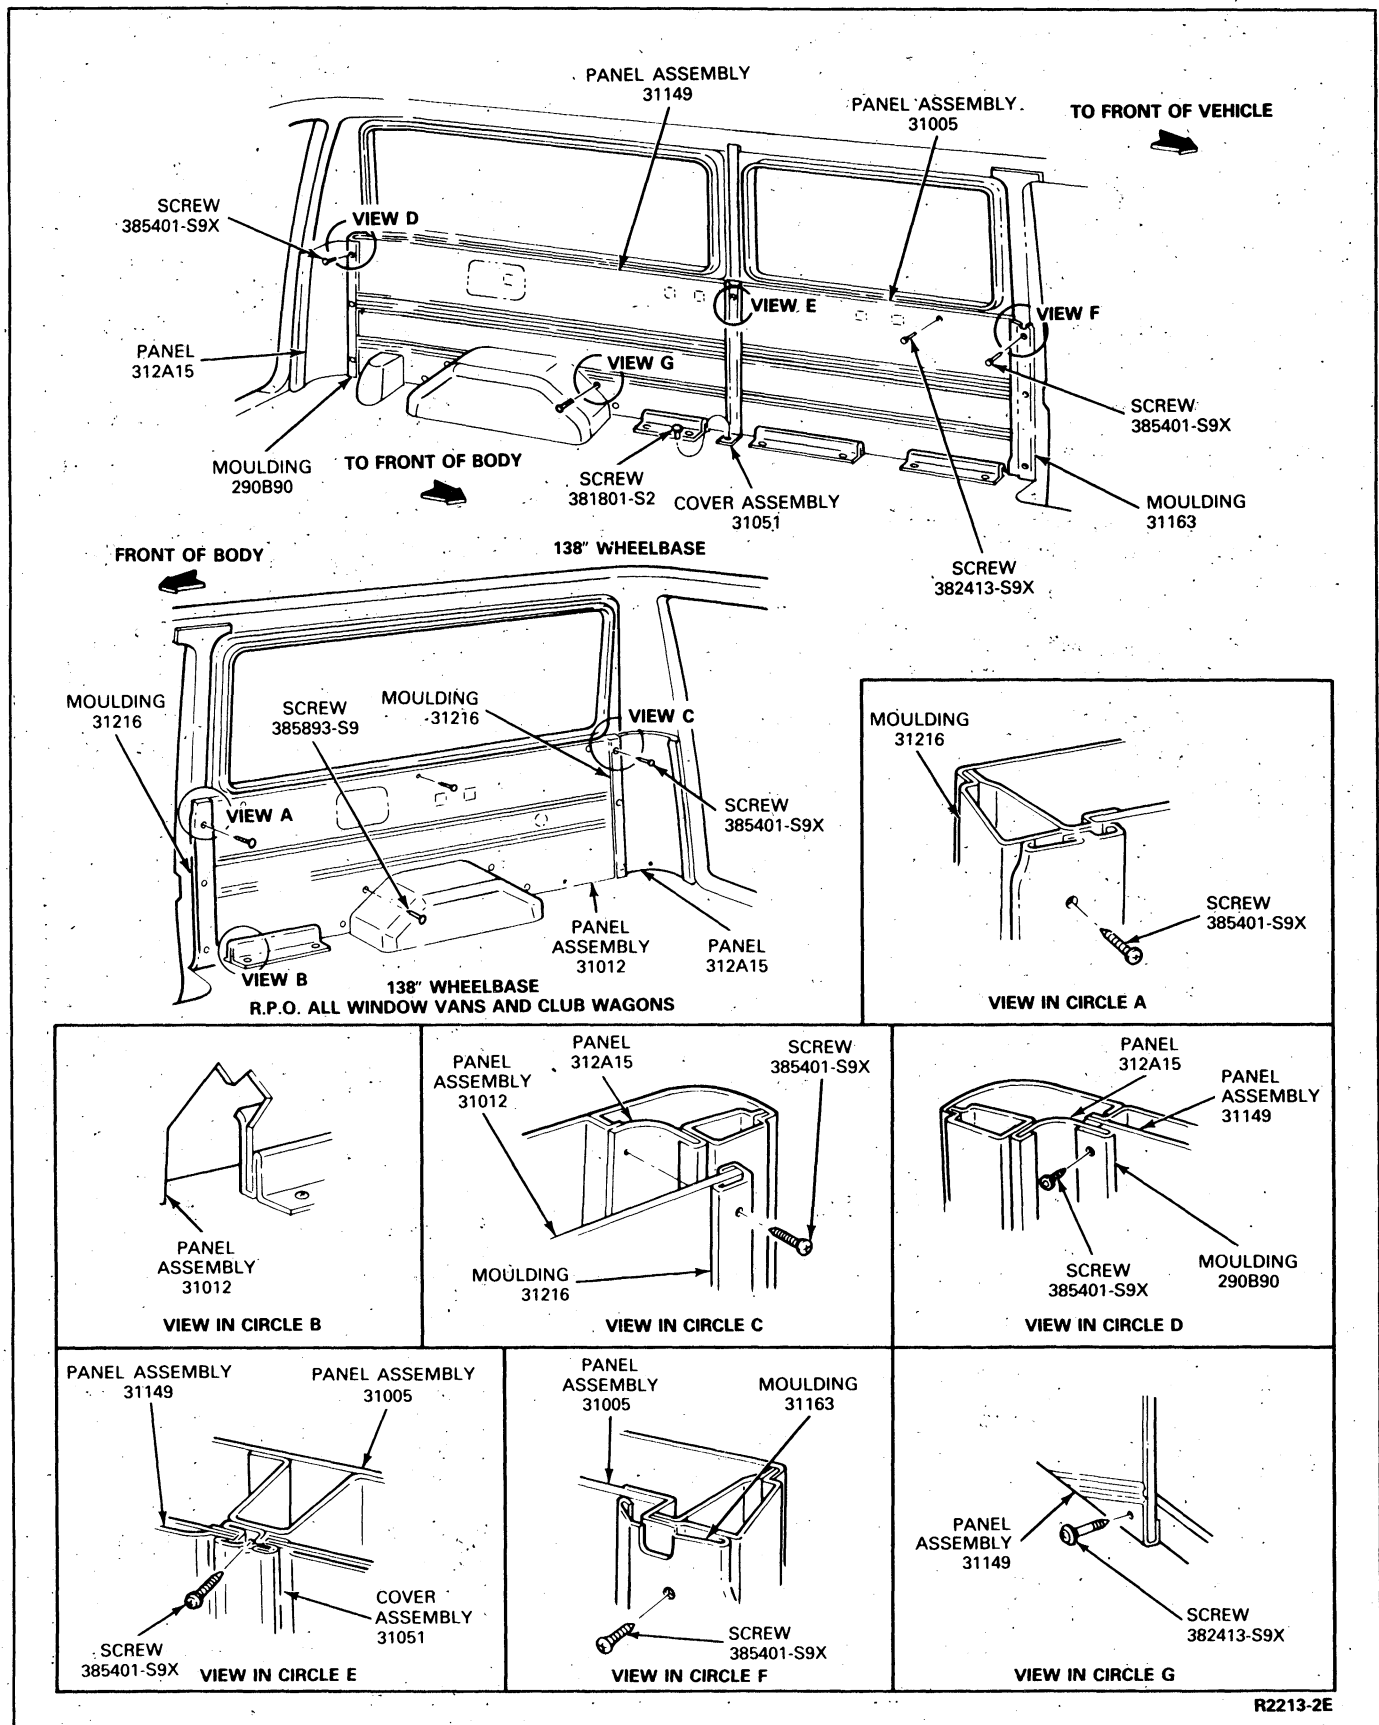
Trim Panel and Mouldings—E-150—E-350
